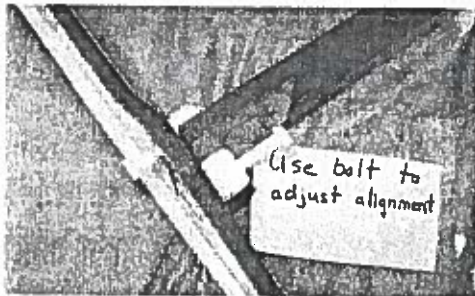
Steering yoke components, Part 2, with forward cross-piece and its retaining pins and bolts.
